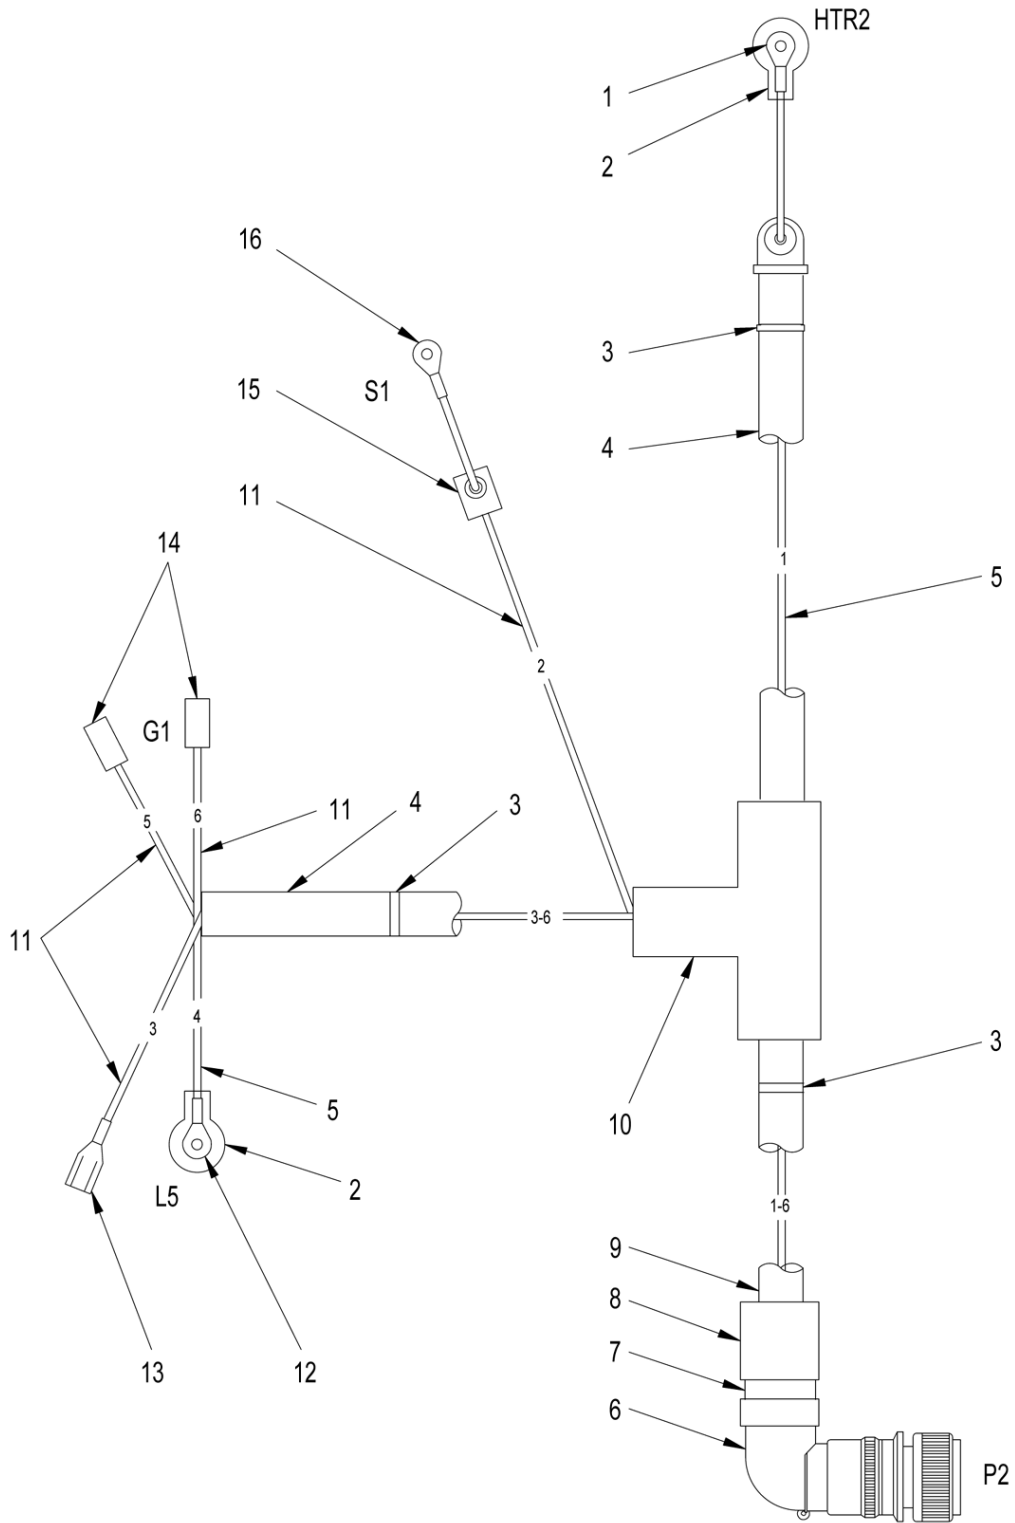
Engine Wiring Harness (MEP-531A/501A).
